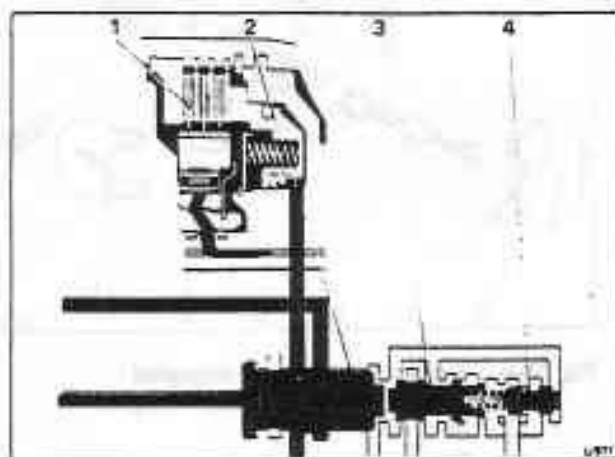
Governor oil acting on the 1-2 shift valve
